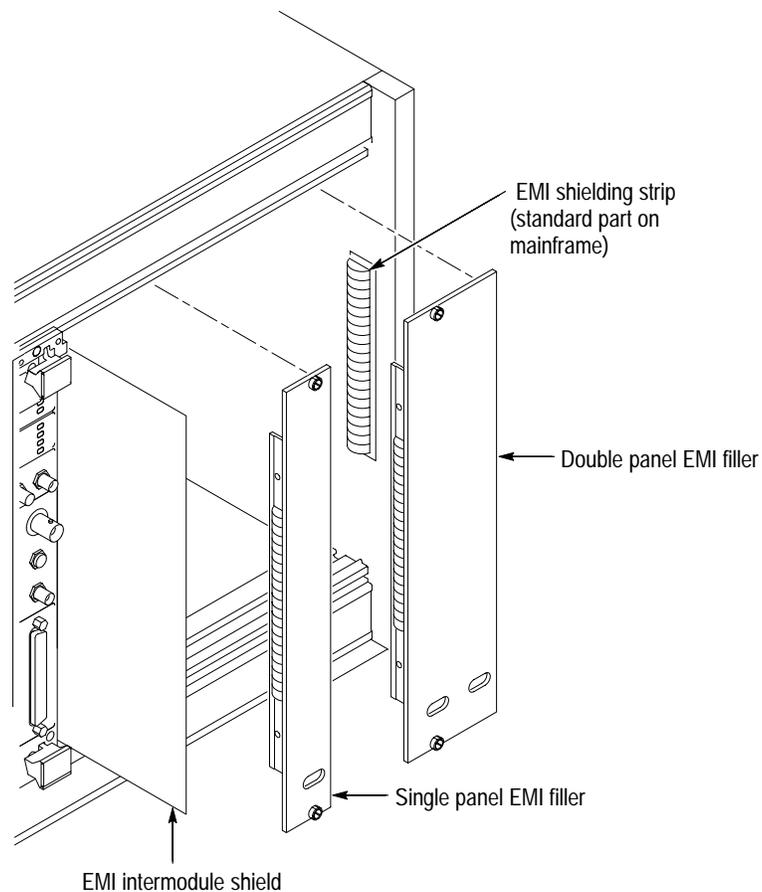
Installing the EMI intermodule shield and front panel EMI fillers
